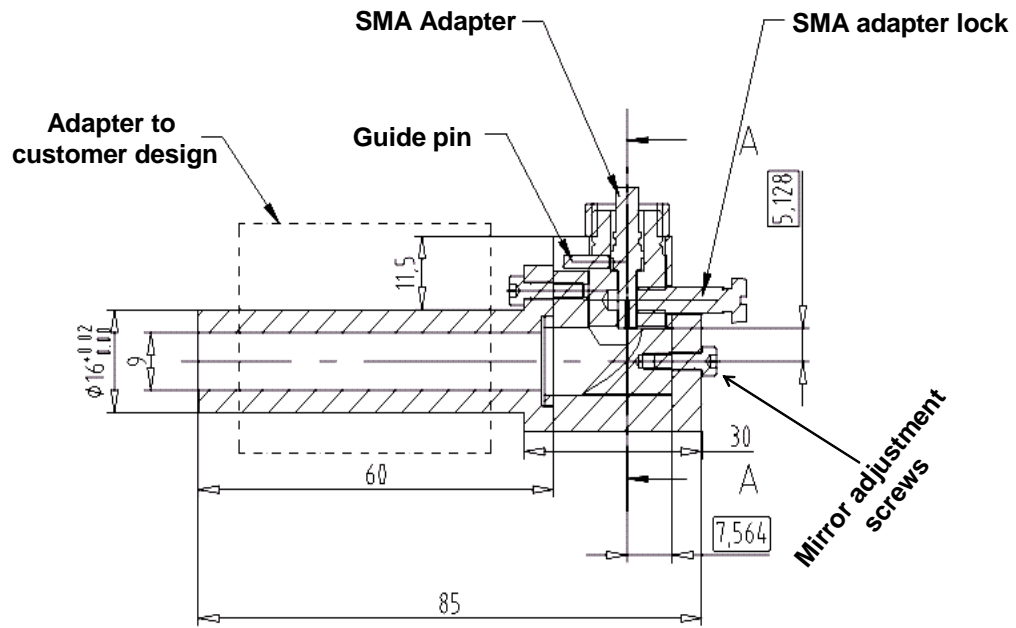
Drawing of the Off Axis Parabolic Mirror housing used for collimation optics.
